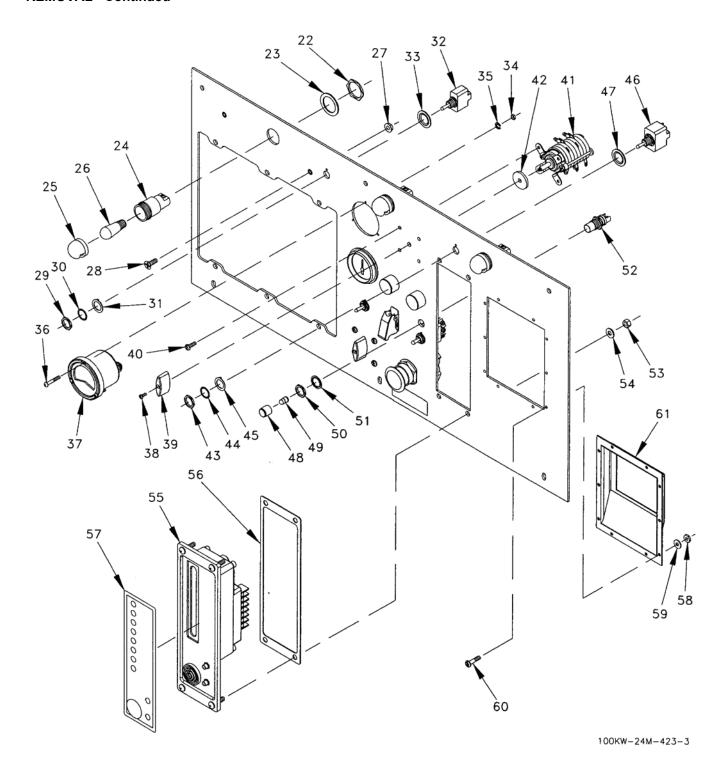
Control Box Panel Assembly (Sheet 3 of 4).
